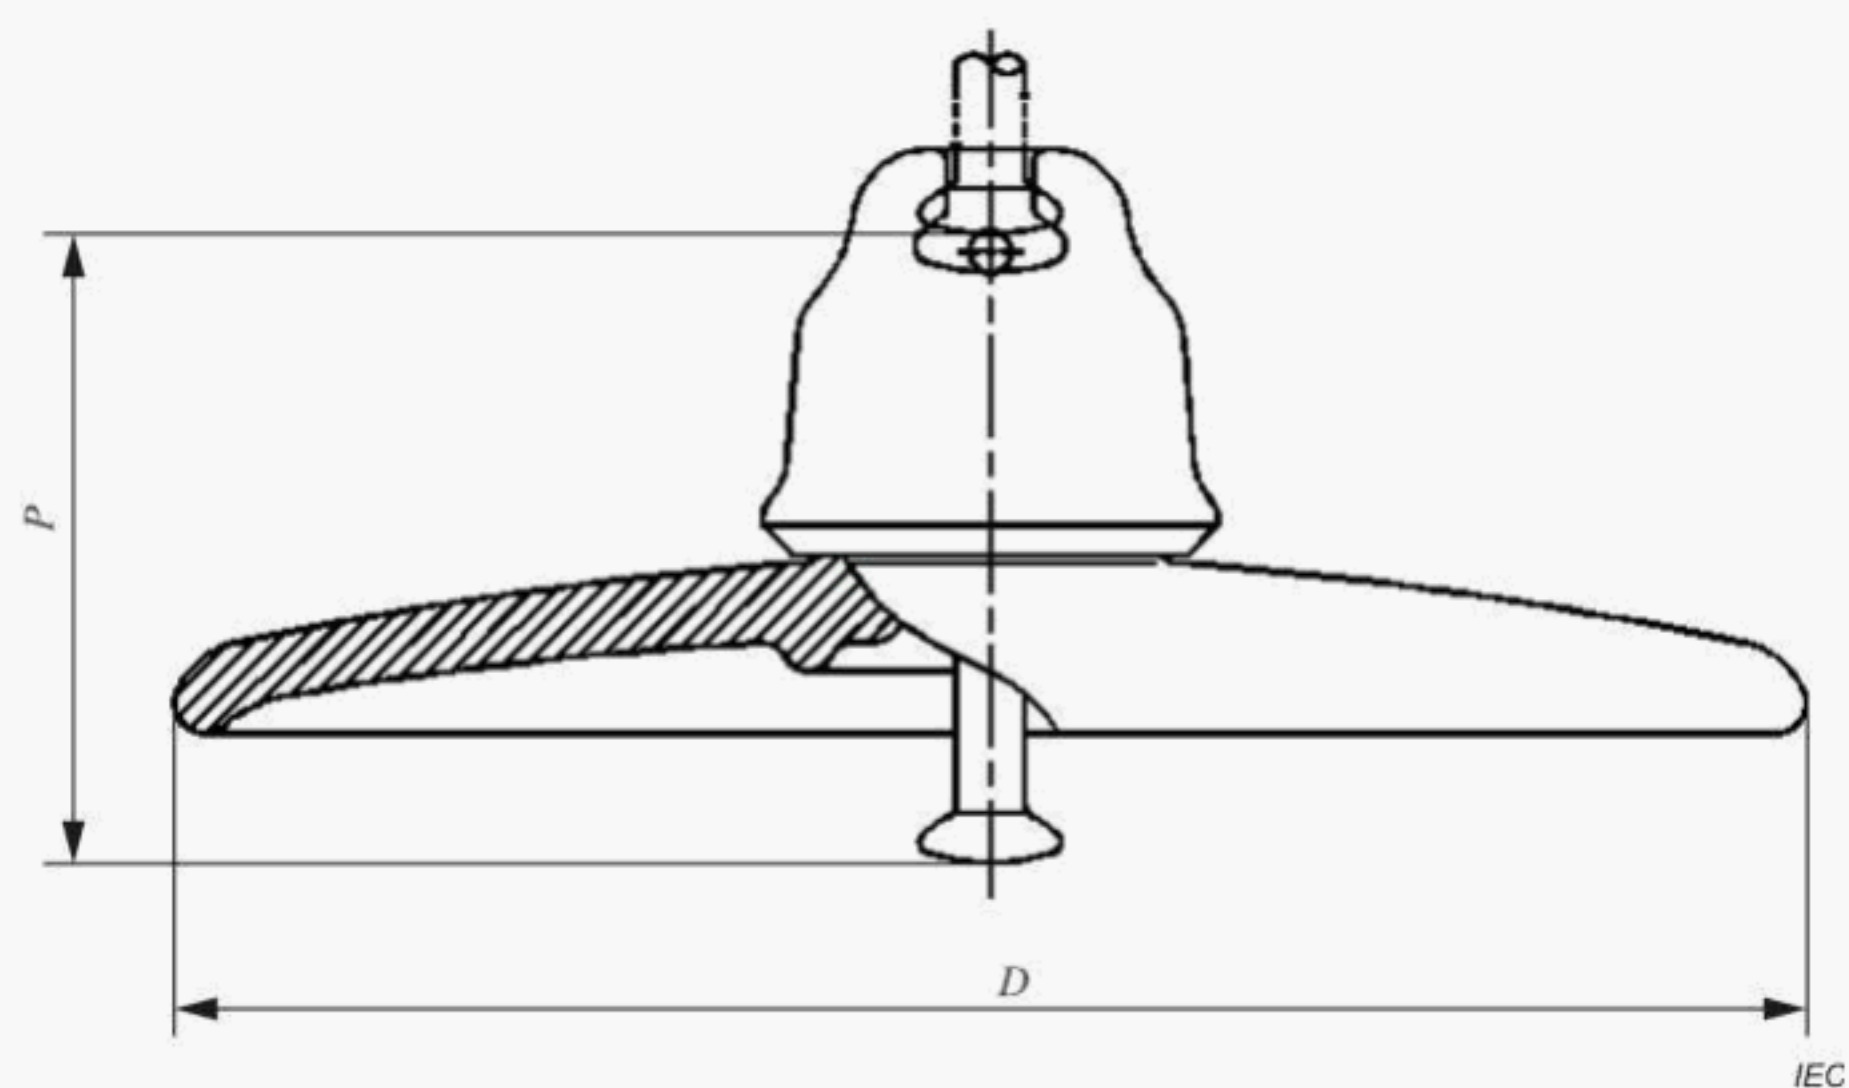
String insulator unit of aerodynamic profile with ball and socket coupling
